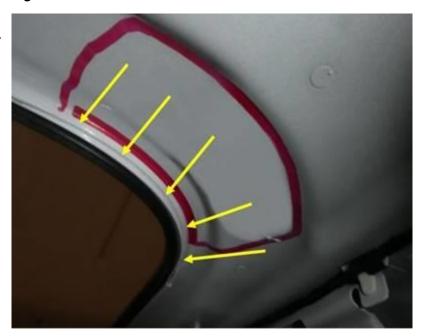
The yellow arrows show the joining seam of the outer roof sheet metal to be separated from the inner roof support.
